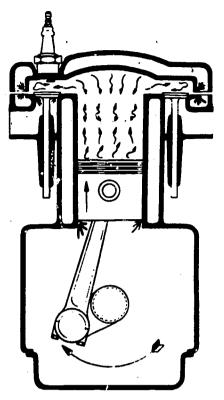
On the compression stroke, compressed air-fuel mixture leakage can occur through burned valves, leaking gaskets, or worn piston rings.
